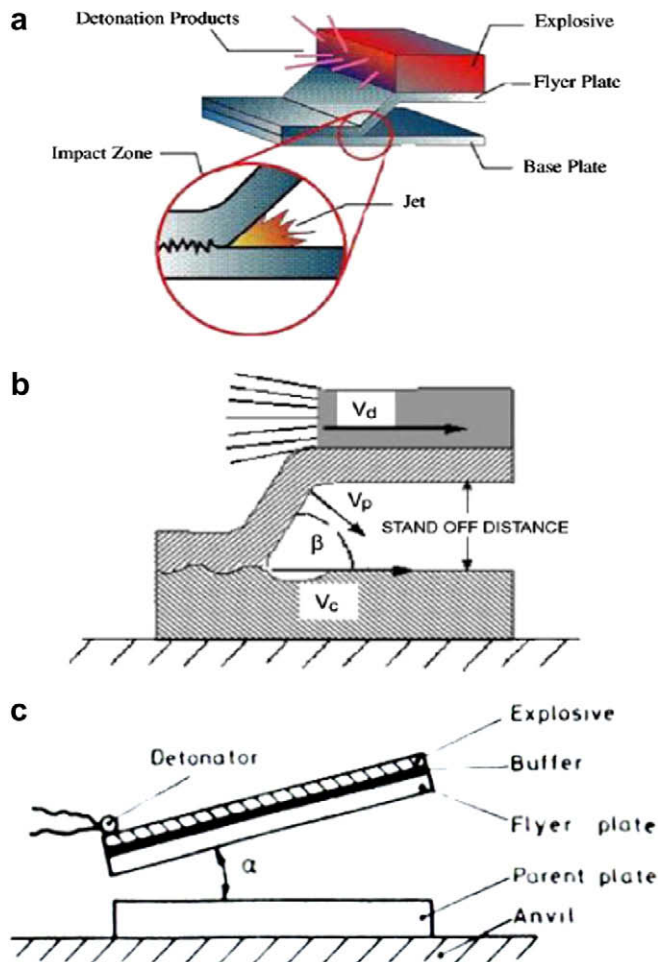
(a) Explosive welding process, (b) explosive welding parameters – parallel geometry and (c) explosive welding process – inclined geometry.
